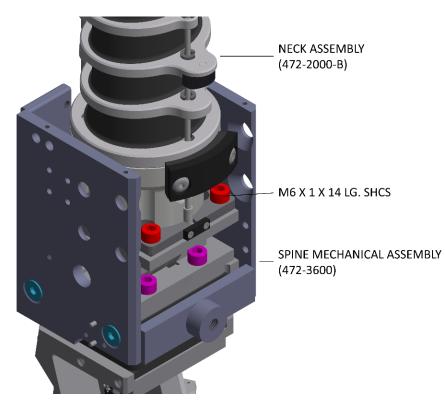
Attach the Neck Assembly to the Spine Assembly
